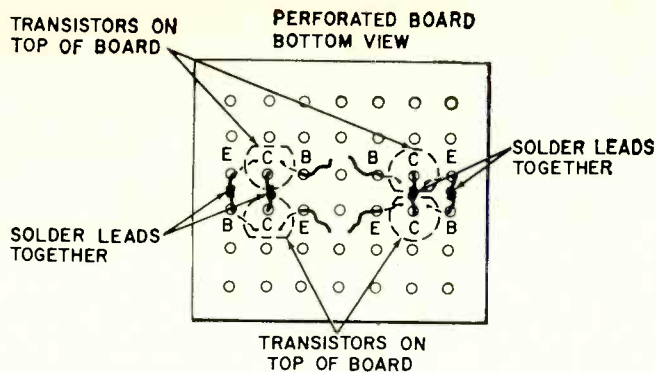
Transistors are mounted directly on perforated board and the leads soldered together. Parts layout is not critical. The board used is $1\frac{3}{8}$ " x 2". A PC board can be made even smaller.
